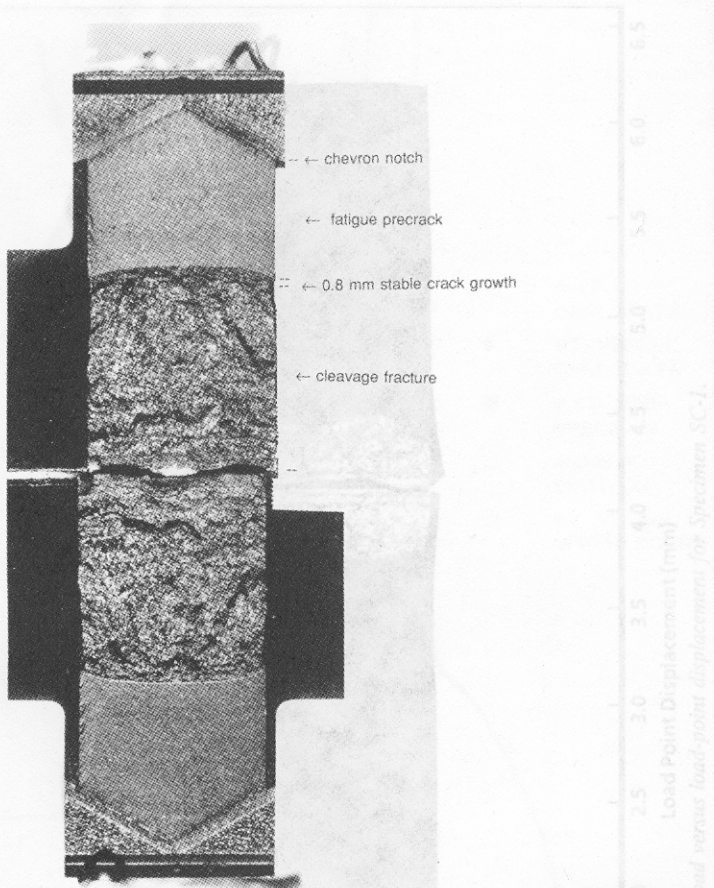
Fracture surface for Specimen SC-2 (tested at 55°C) showing predominant brittle fracture (specimen thickness = 1 cm).
